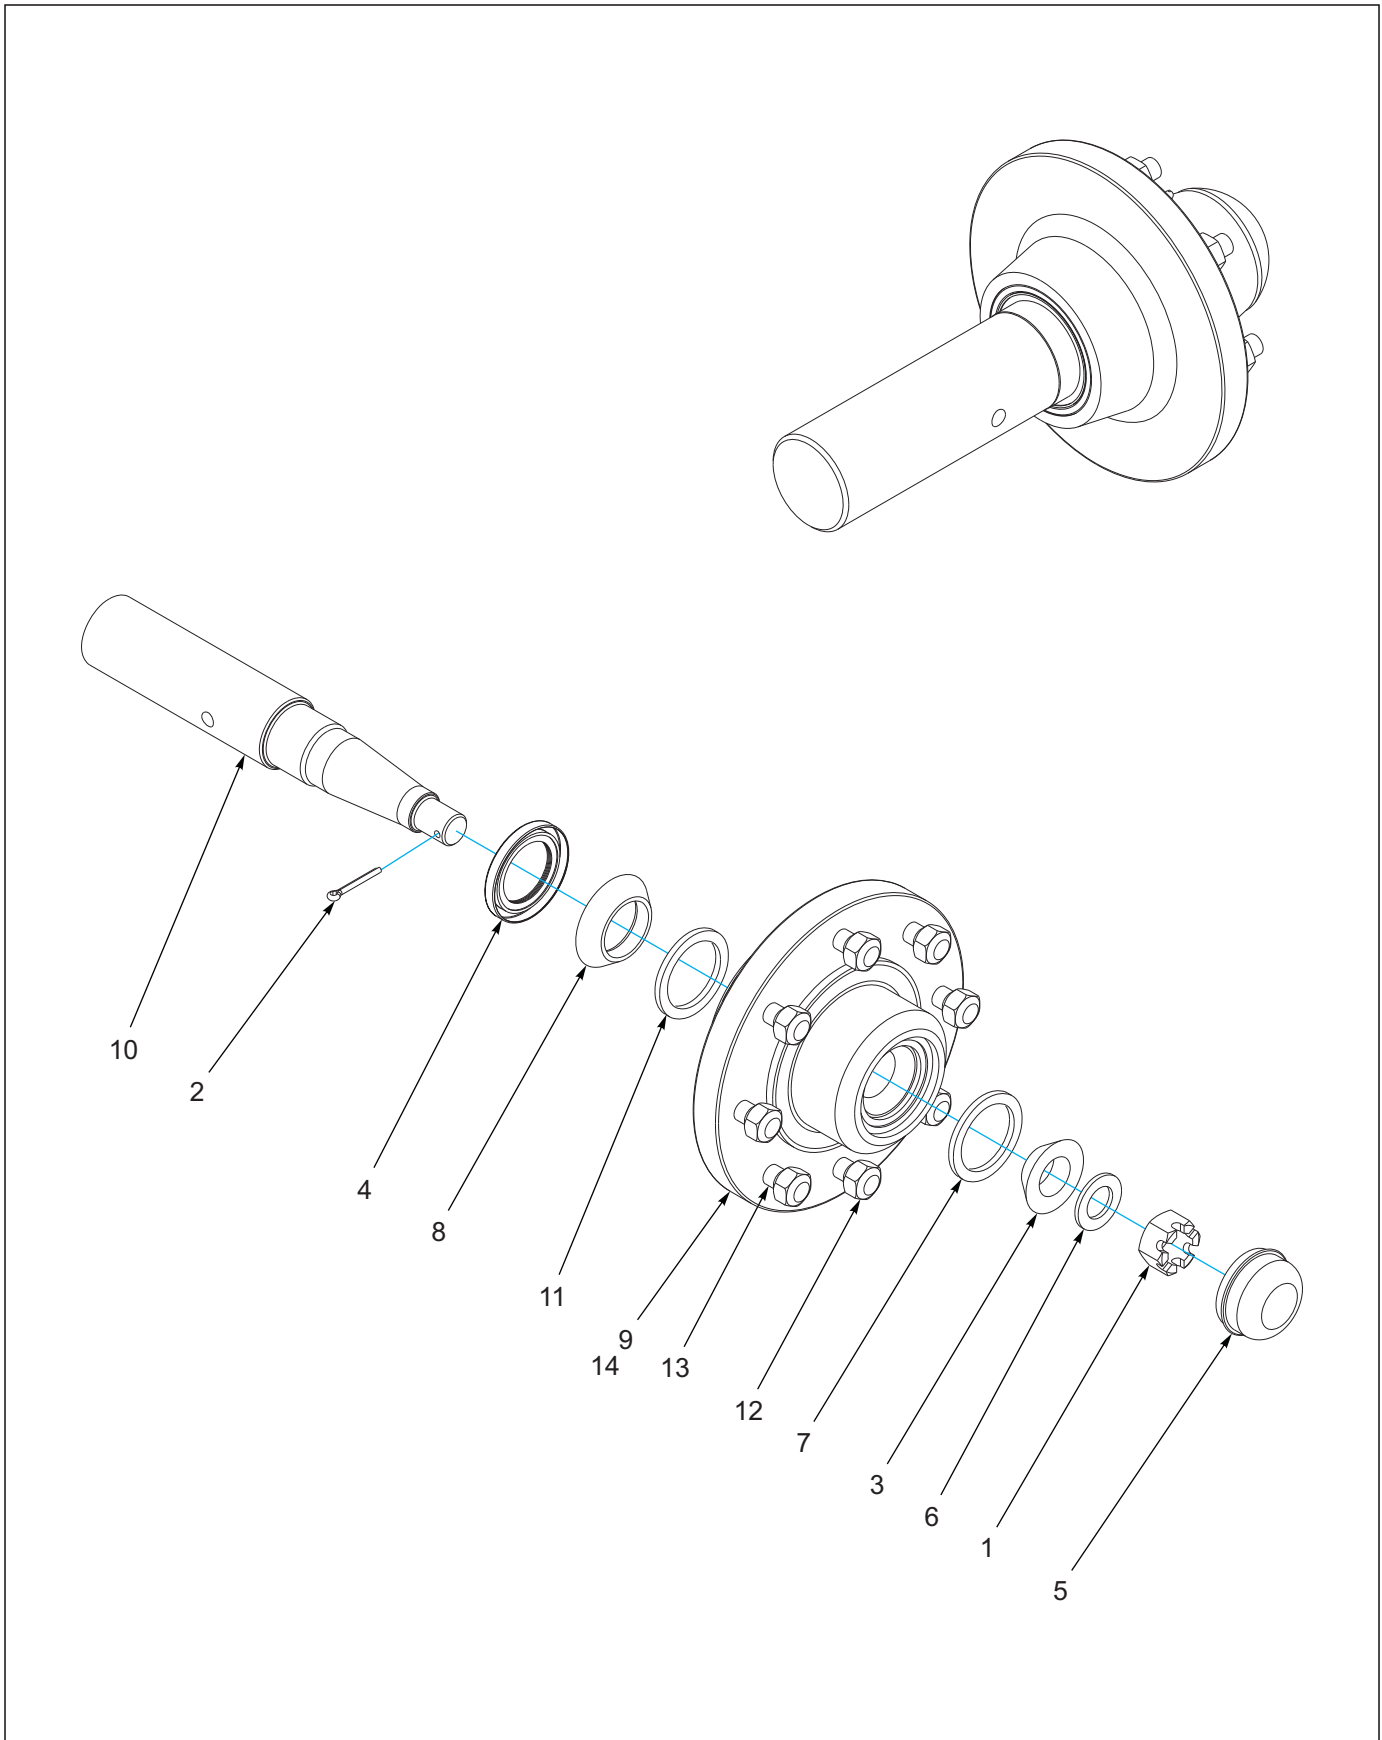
Hub and Spindle Assembly - 8 Bolt (2-1/4")
